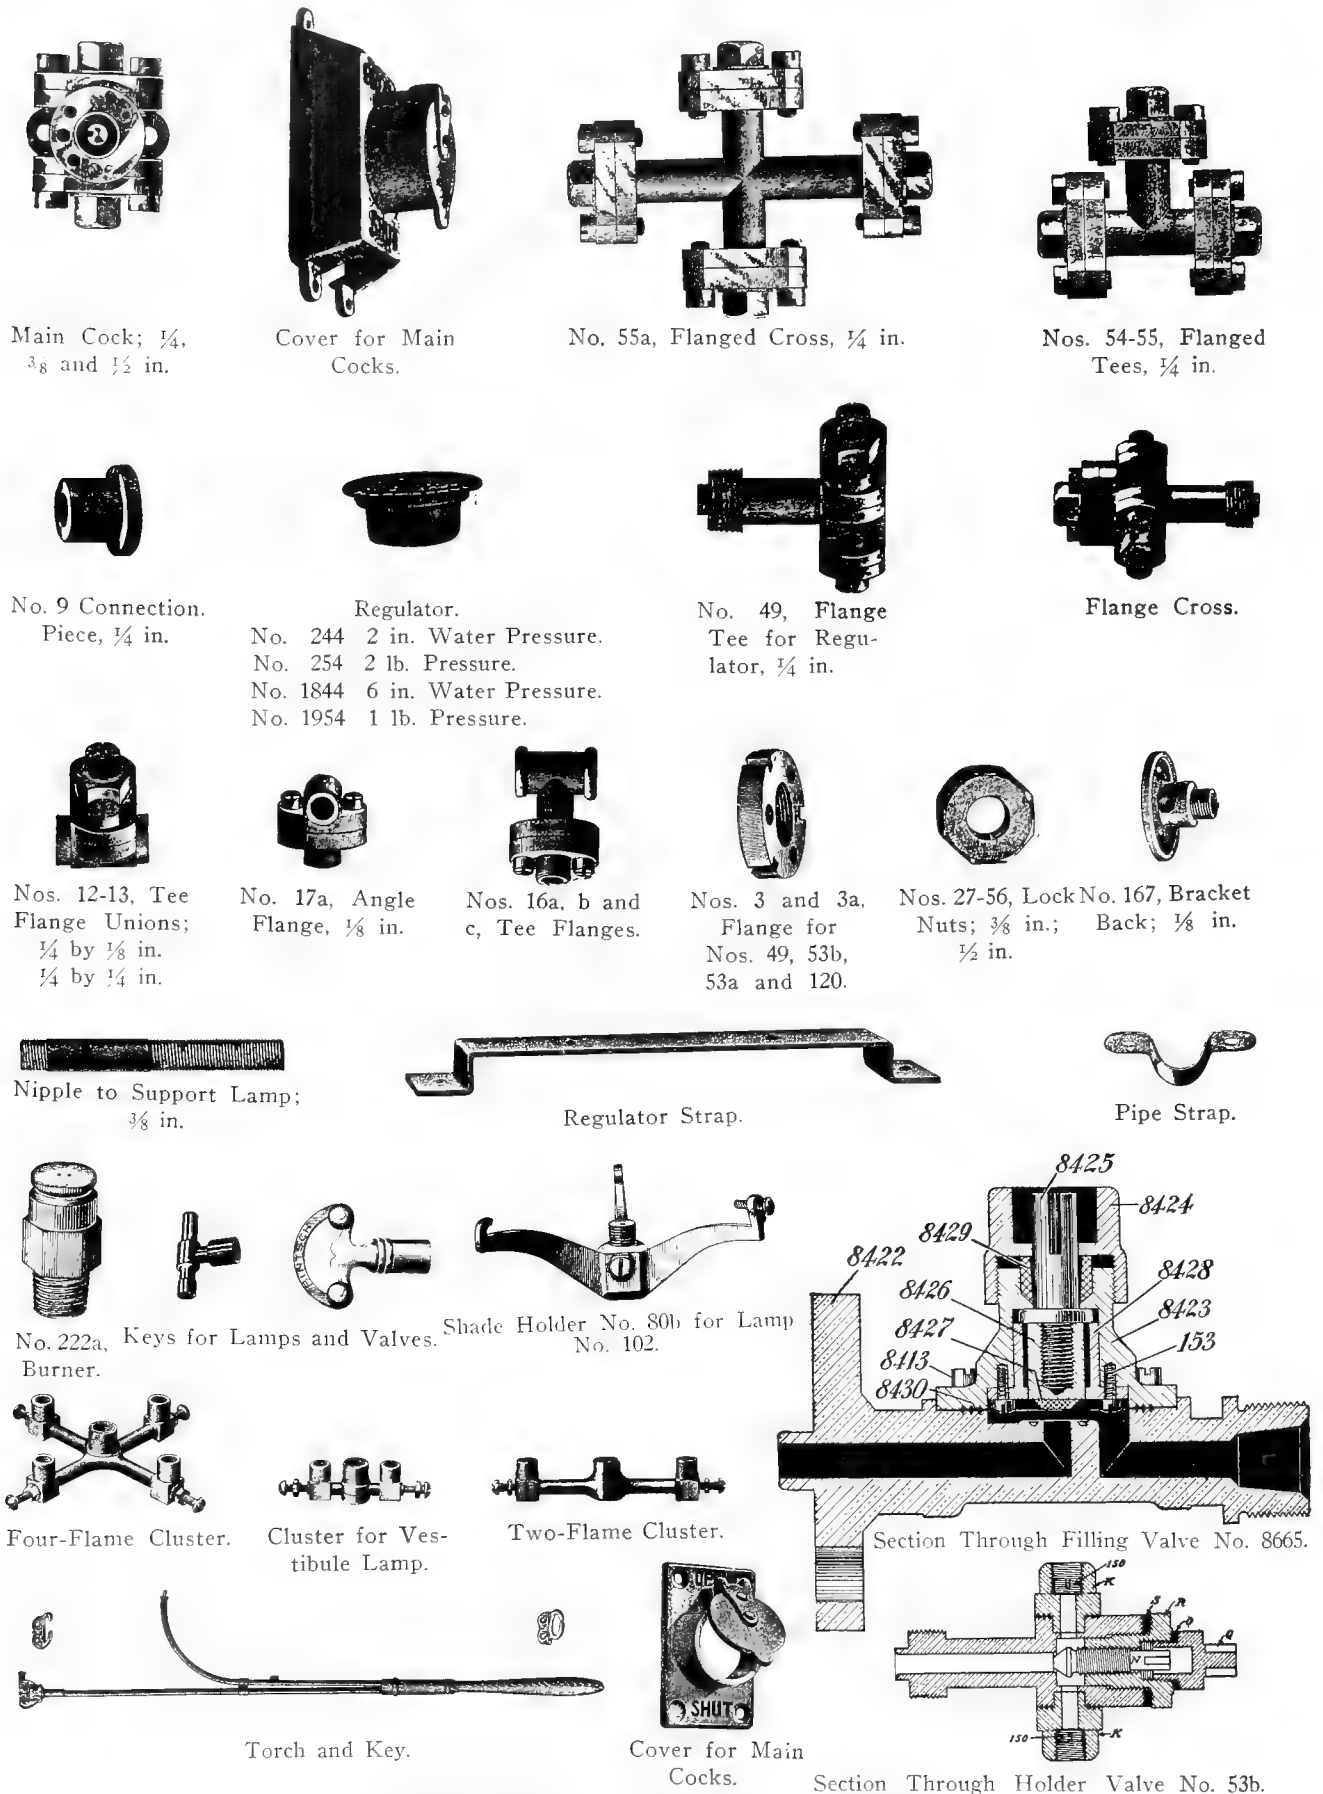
Details Used in Pintsch System of Gas Lighting.
